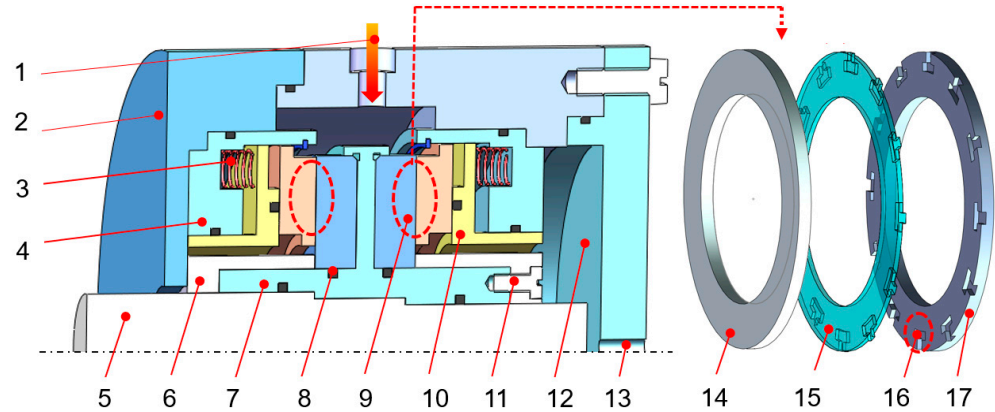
Schematic diagram of dry gas seal structure. 1—Buffer gas; 2—Sealing house; 3—Spring; 4—Spring seat; 5—Rotating shaft; 6—Pressing sleeve; 7—Shaft sleeve; 8—O-ring; 9—Stationary ring; 10—Thrust collar; 11—Fixing bolt; 12—End cover; 13—Flowmeter interface; 14—Stationary ring; 15—Gas film; 16—T-groove; 17—Rotating ring.
